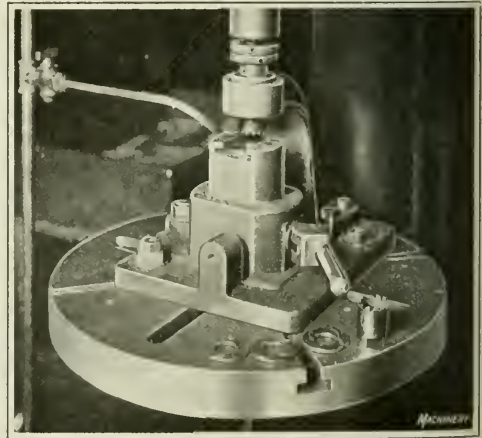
Drilling Machine and Fixture used in cutting Oil-grooves in Bronze Washers
